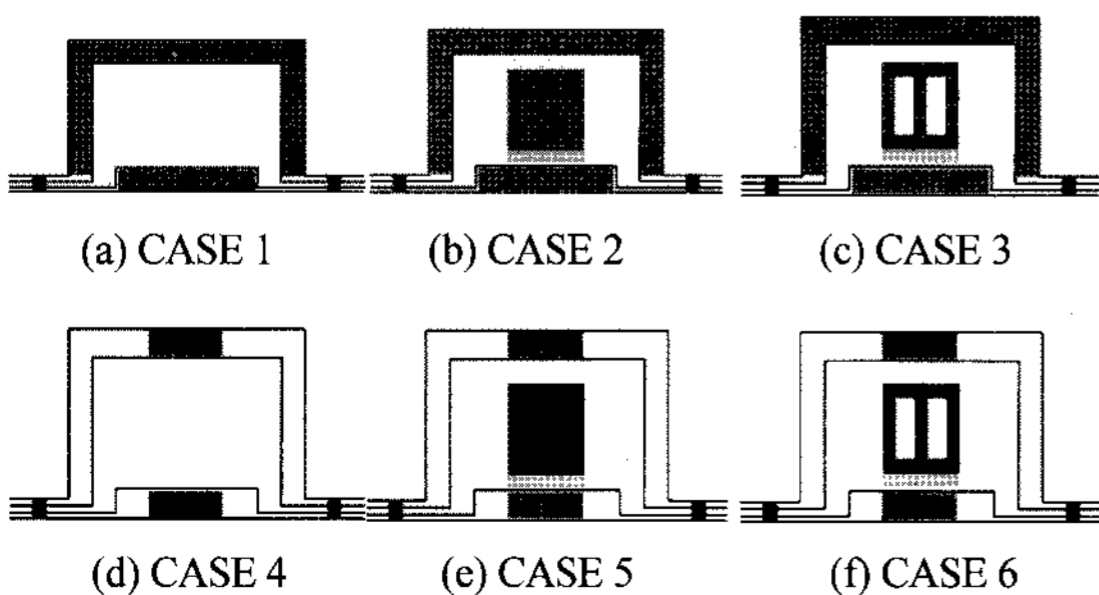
Cross-section member types using structural foam and plastic reinforcement
